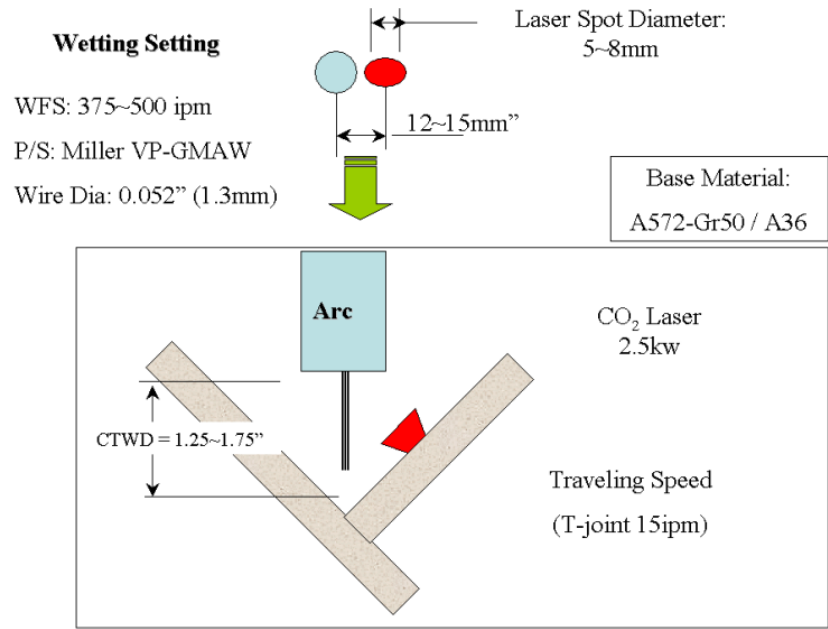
GMAW Torch and Laser Setup Window for 1F Position welding
